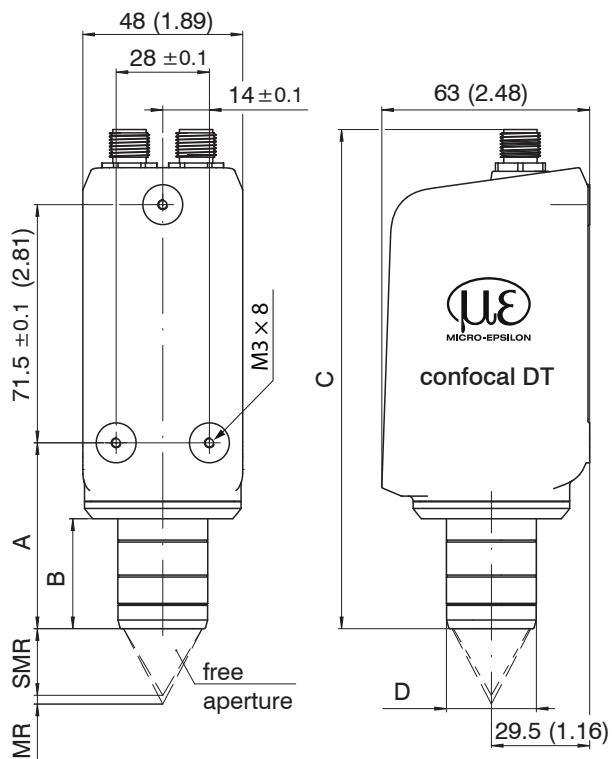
Dimensional drawing IFD2410 / IFD2415, dimensions in mm
